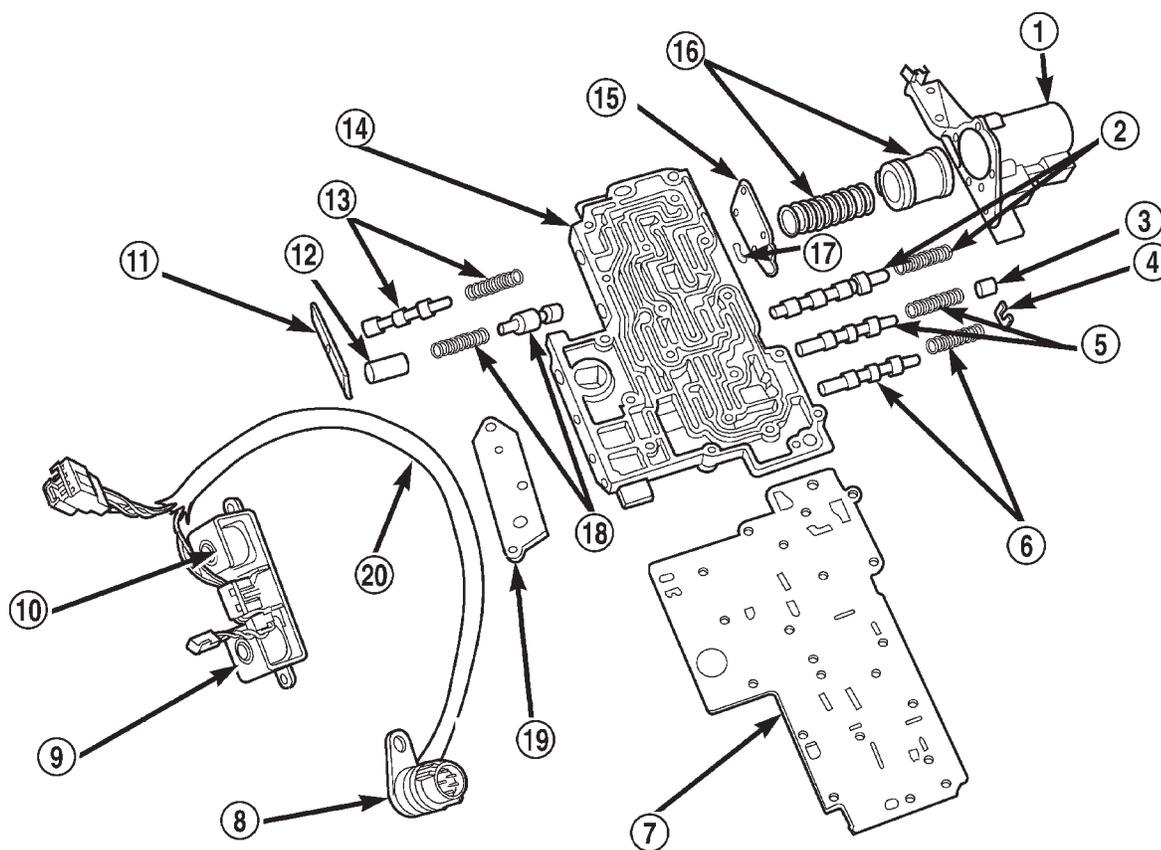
Upper Housing Shift Valve and Pressure Plug Locations
